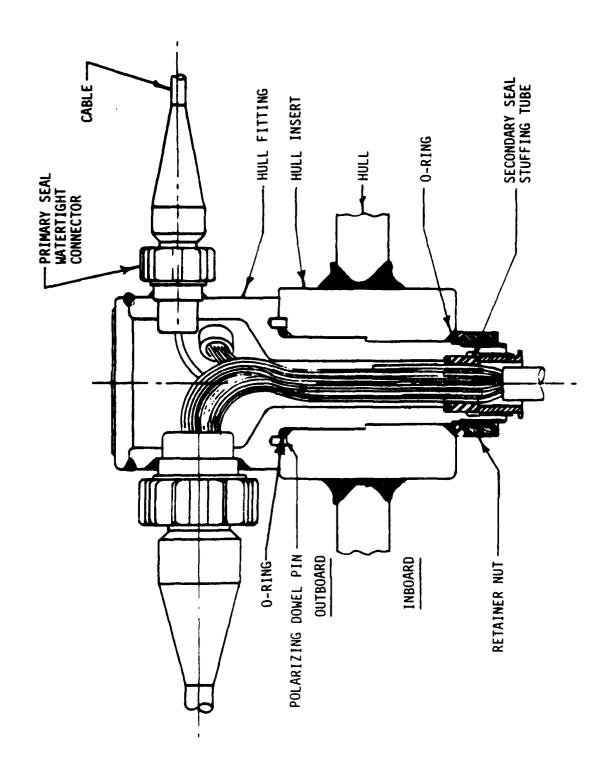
MIL-C-24231 multiple connector hull penetrator.
